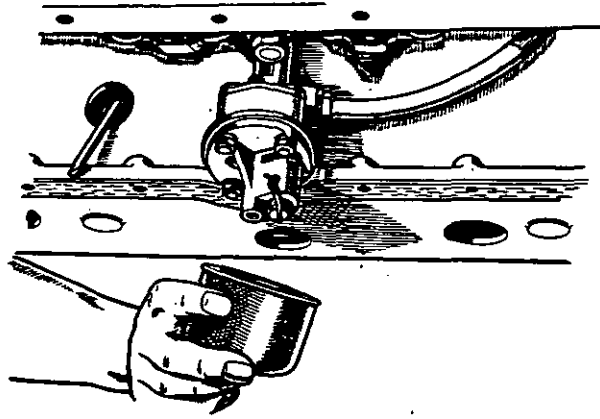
REMOVING THE OIL PUMP GAUZE FILTER
